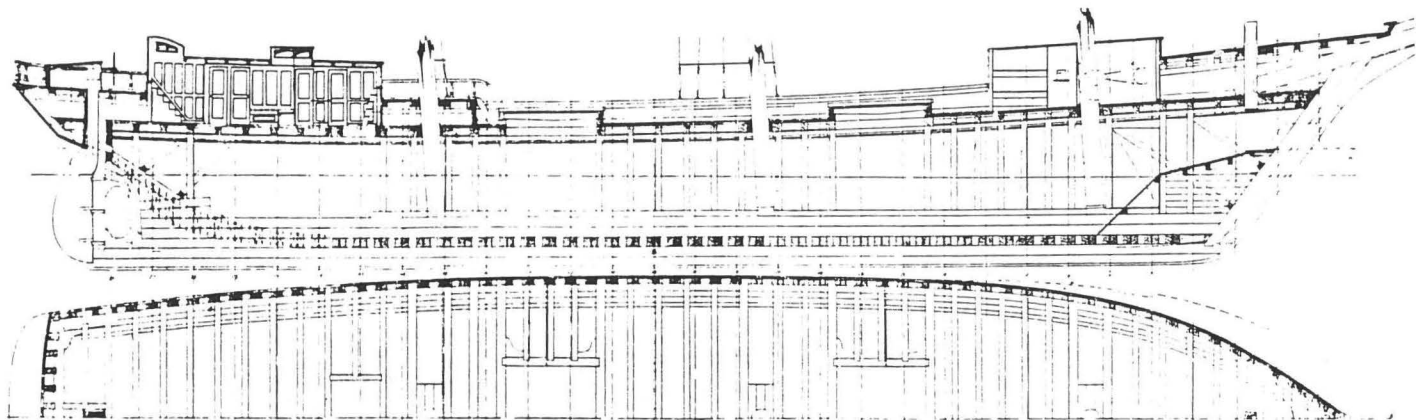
Construction Plan of Three-Masted Auxillary Schooner, Which Will Carry 700 Tons Dead Weight
